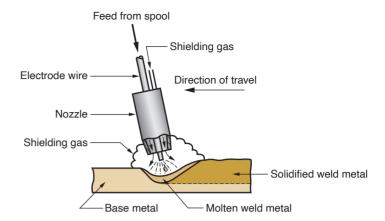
Gas metal arc welding (GMAW).
